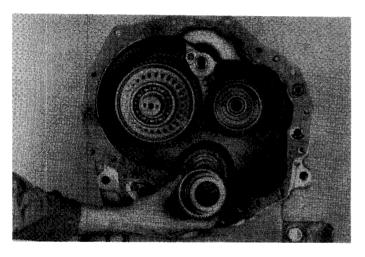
Position 4th speed clutch disc hub on idler shaft.
